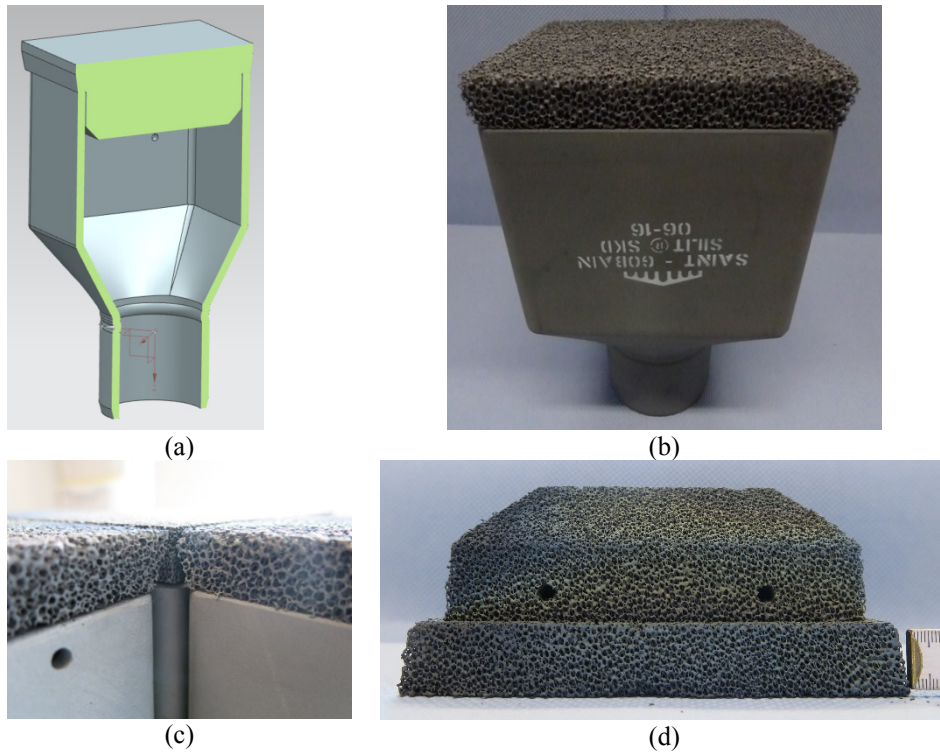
Universal cup and foam absorber - (a) 3-D view of cup and foam absorber, (b) Picture of the real cup assembly, (c) Detailed view of cup foam arrangement, (d) 30 PPI sample for cup-level testing – 65 mm thickness and 20x20 mm frustum
